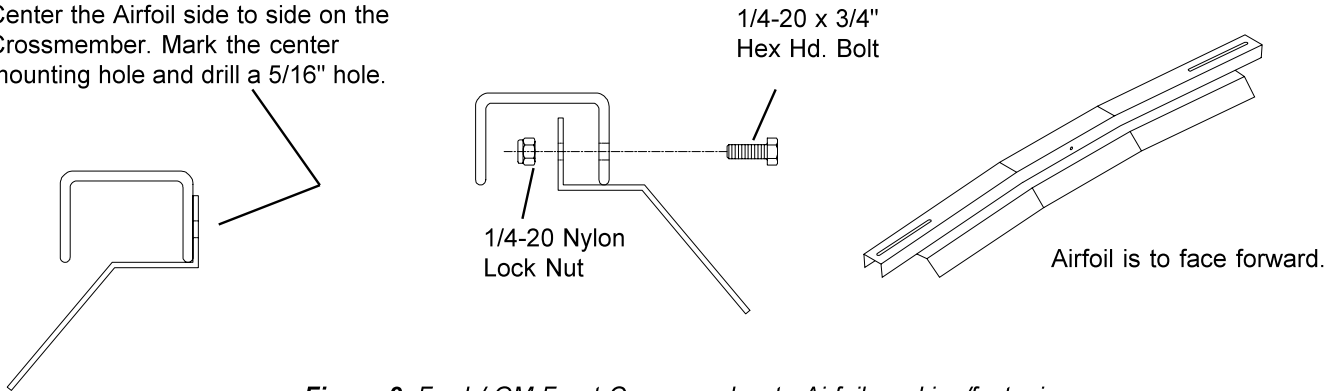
Ford / GM Front Crossmember to Airfoil marking/fastening
